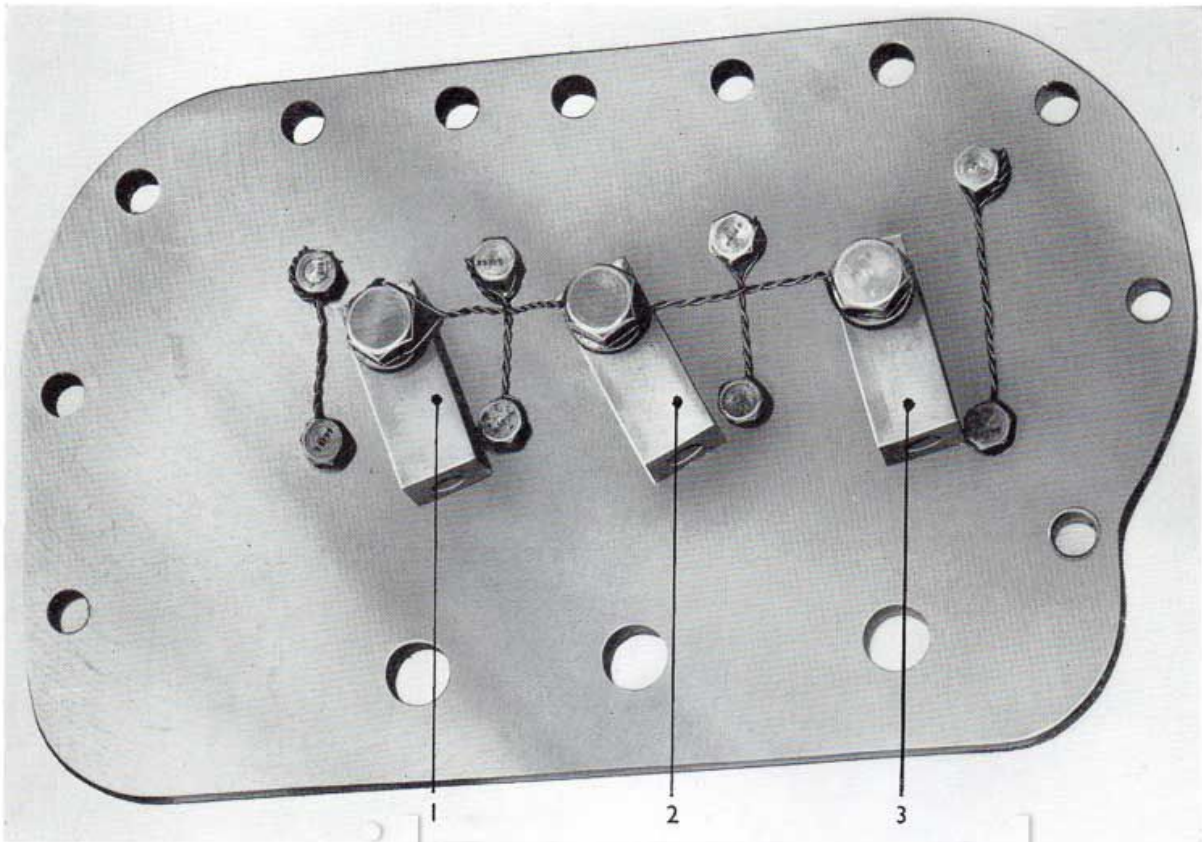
VIEW OF CYLINDER BLOCK PLATE SHOWING LOCATION OF AIR RESTRICTORS.
